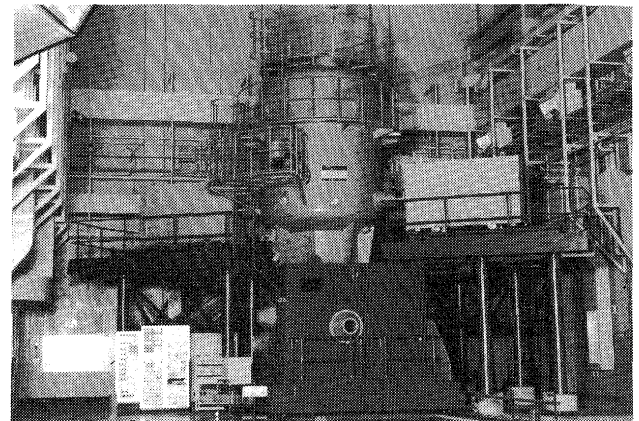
(b) 300 kW 600 kV EB Welder.
